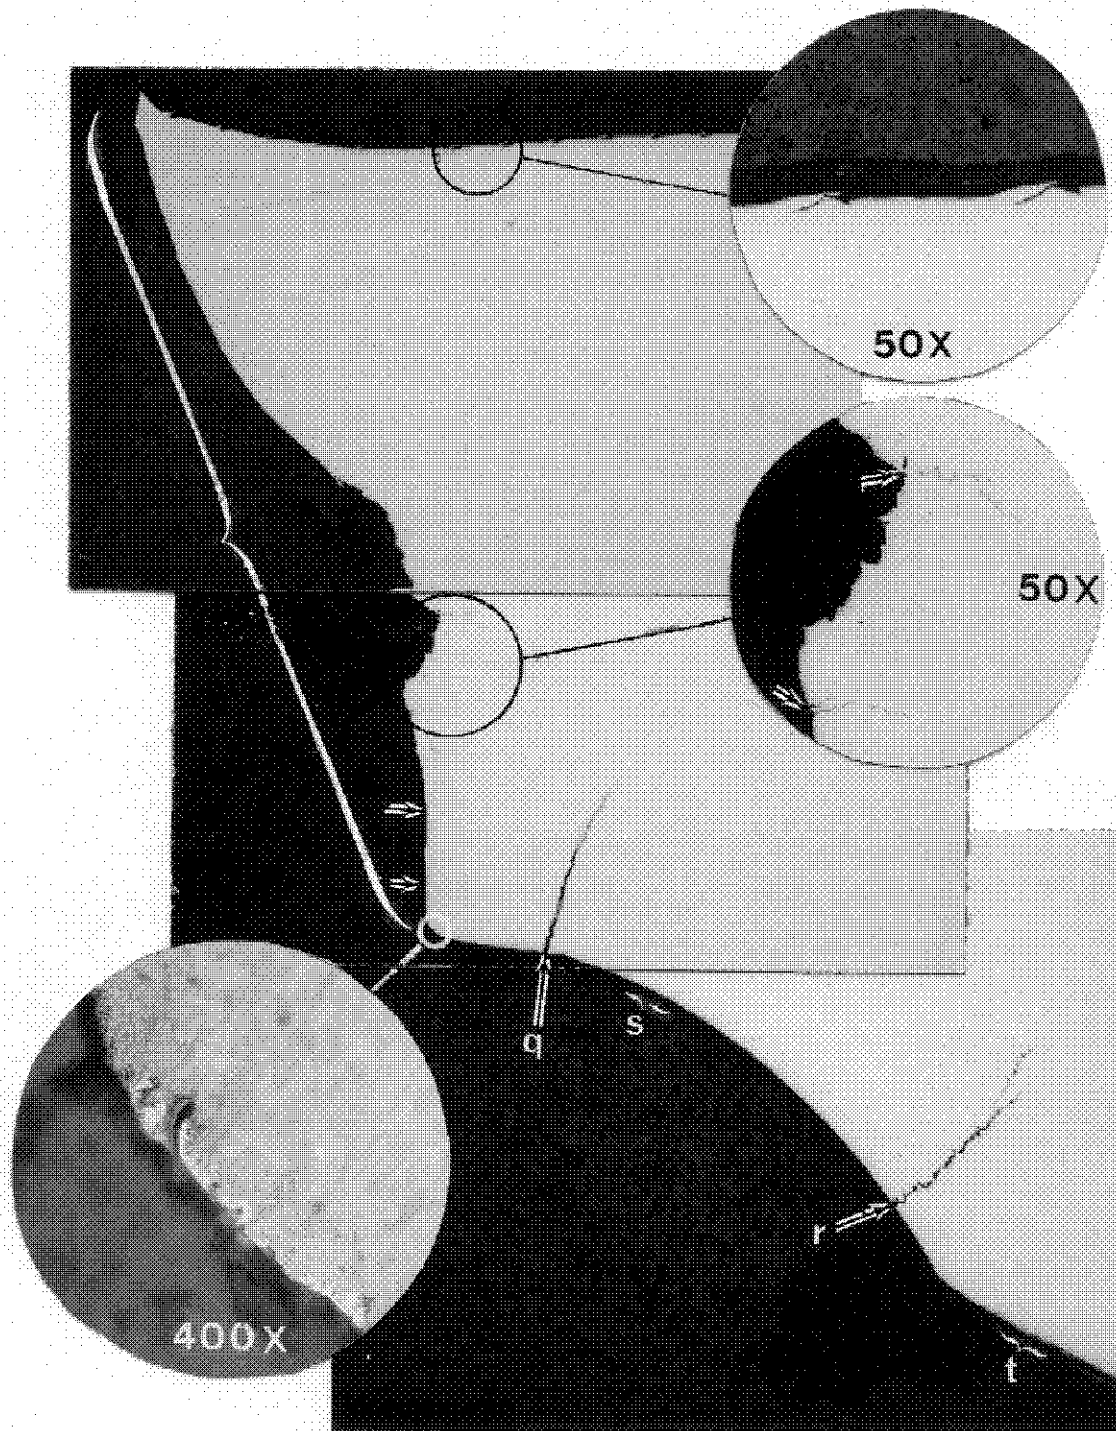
Sectional view of the fracture face and the adjacent ball groove along cutting line "p1". (20X)
